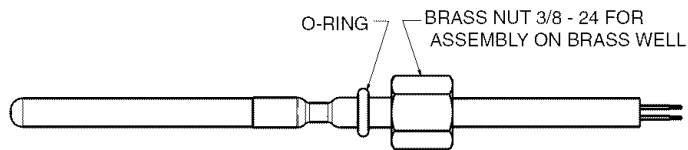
5K Thermistor (Sensor 00PG000008105A, Connector: HY06AM016)
